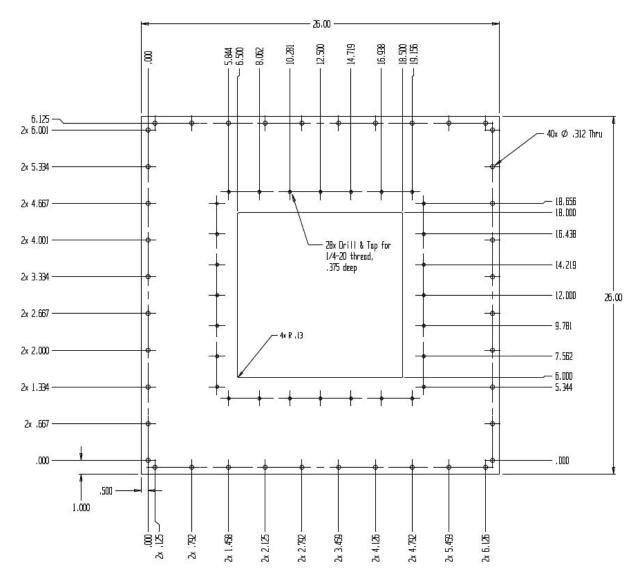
Main Adapter Plate for Mounting Test Plate Sets to Wall of Shielded Enclosure
